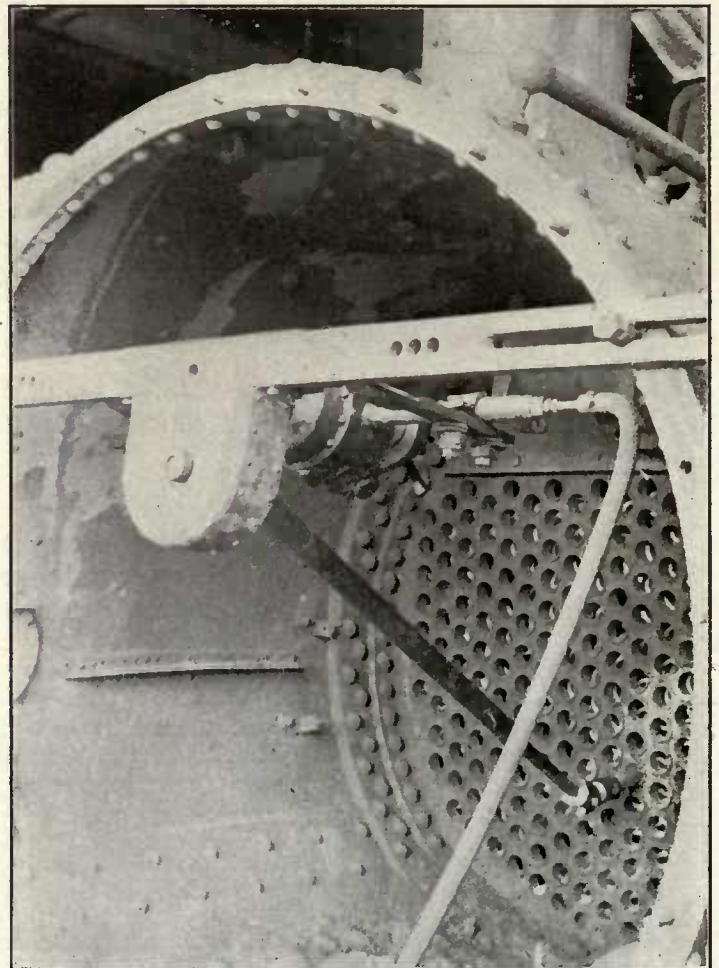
Apparatus Adjusted for Cutting Out Tubes.
